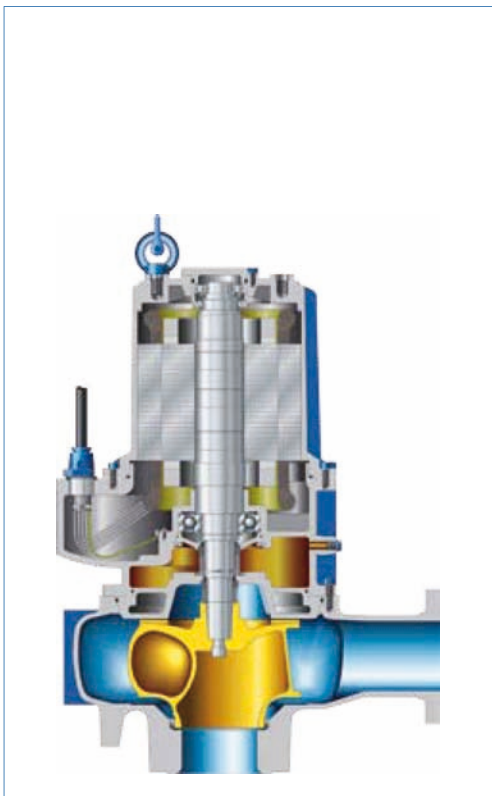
Sectional drawing of a KRT 4 to 60 kW
